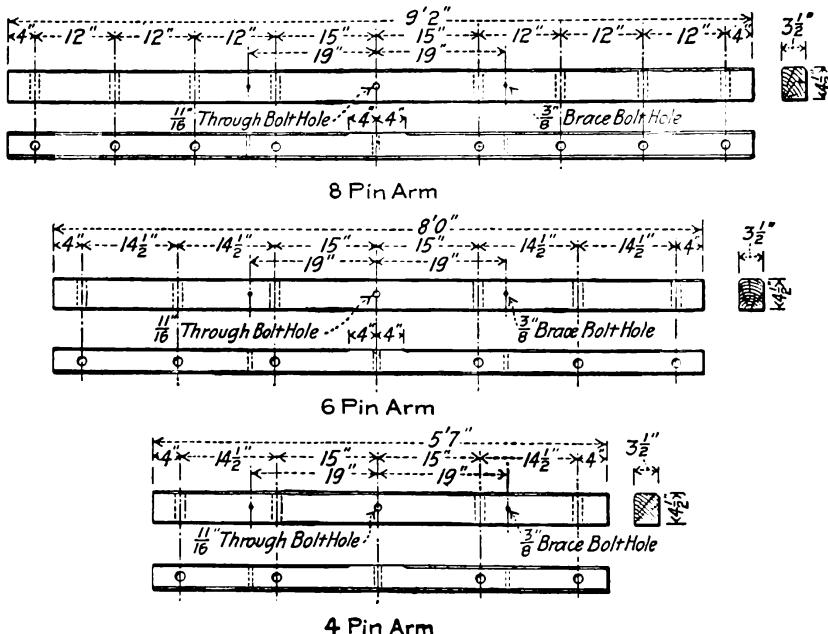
Cross-arm dimensions recommended by the N. E. L. A.
